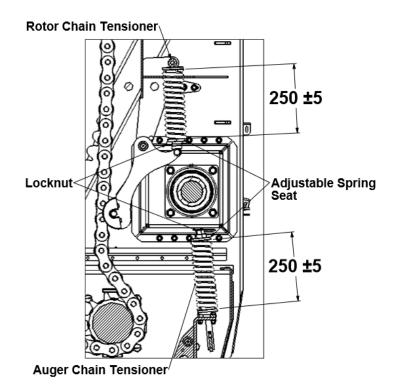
Rotor and auger chain tension spring setting (540 RPM driveline)
